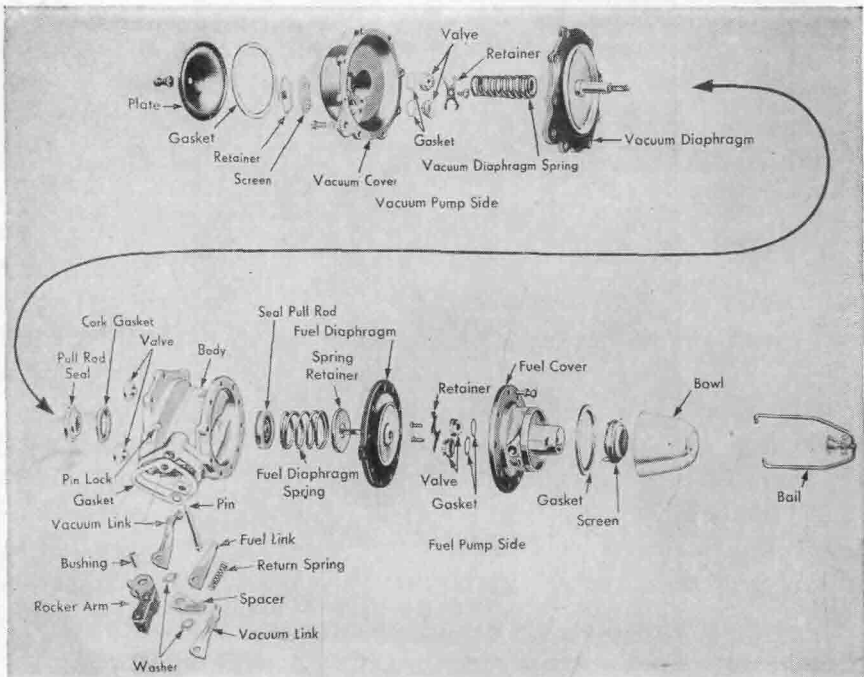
Disassembled view of combination fuel and vacuum pump. (Cadillac Motor Car Division of General Motors Corporation)
